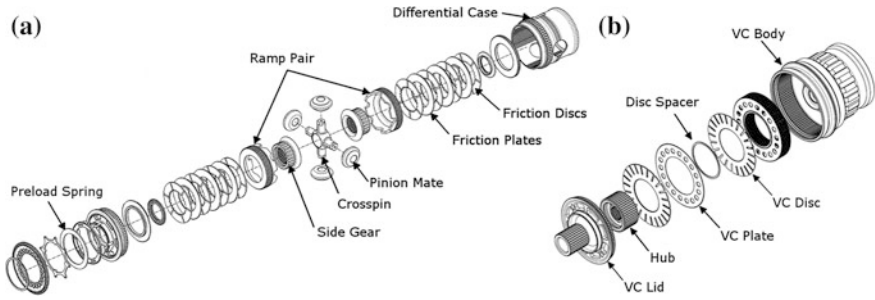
a Exploded view of Xtrac [4] plate differential and b viscous coupling
